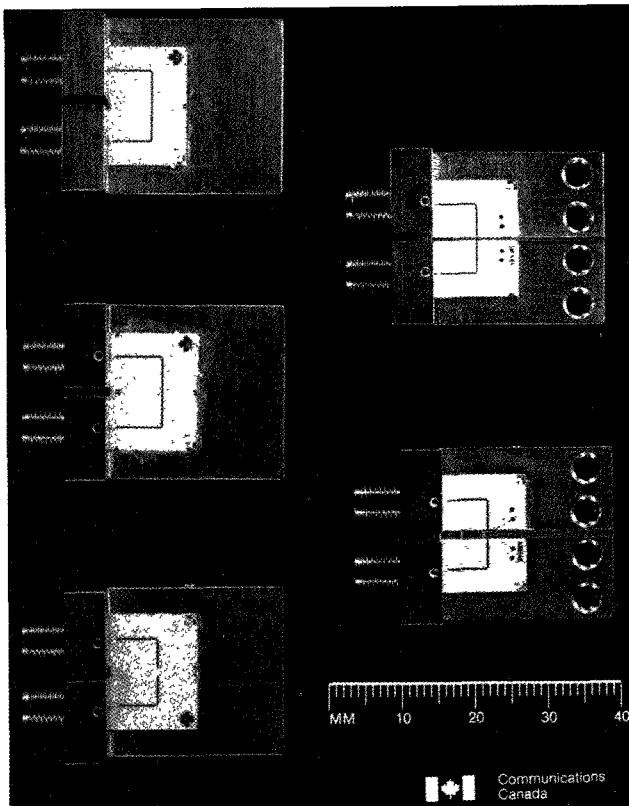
Microwave Jigs - Counterclockwise from top left - Through, Line, Open, measurement jig with an interdigitated capacitor, measurement jig with a Gould 0503 MESFET.
